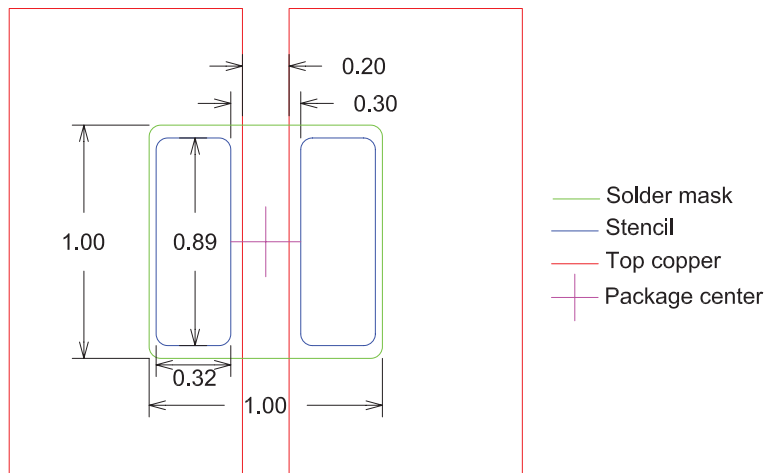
Recommended PCB solder pad layout for LUXEON UV FC Line.
